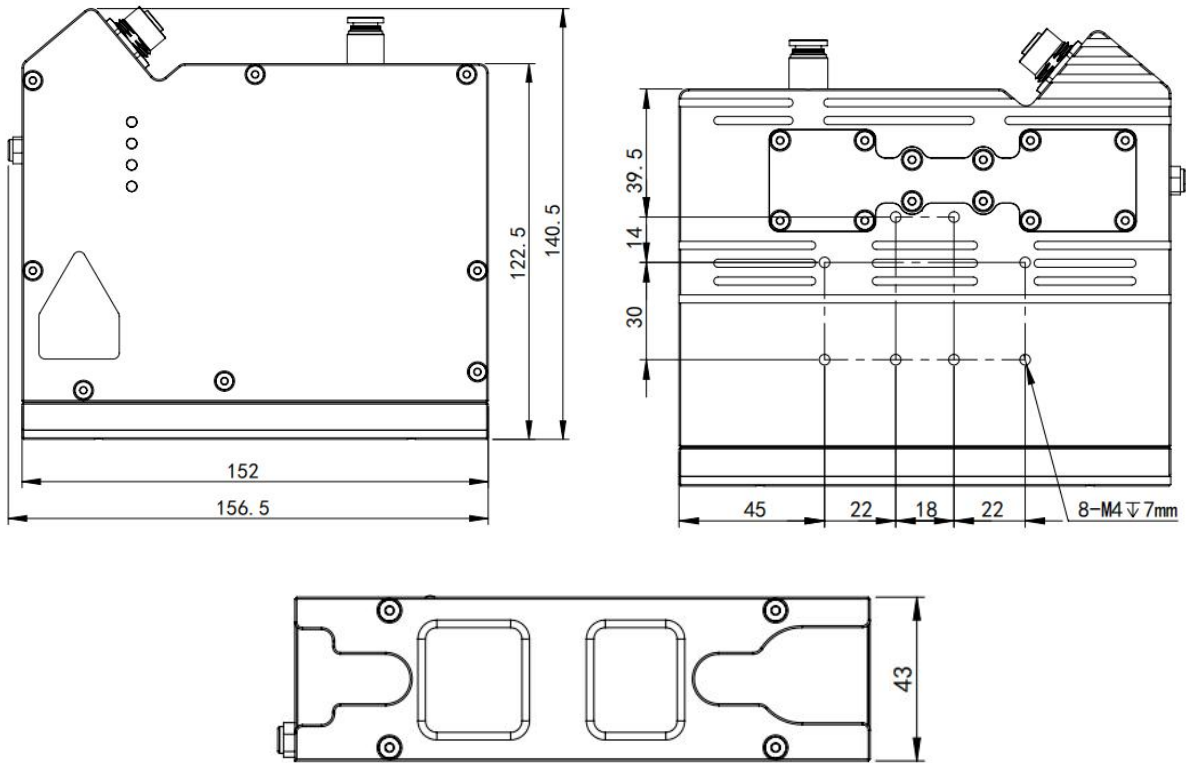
BCW600G-E dimensions (Unit: mm)
